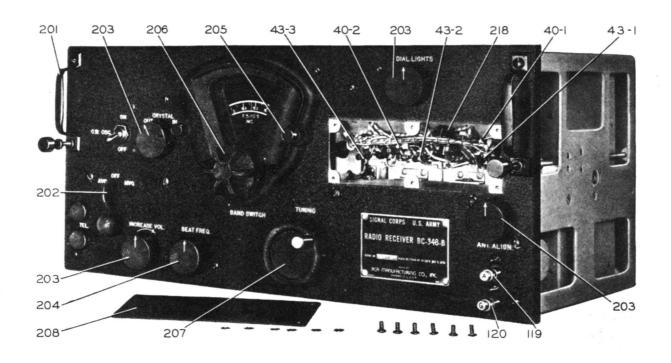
Radio Receiver BC-348-B: Front View of Chassis with Tube Shelf Cover Removed
